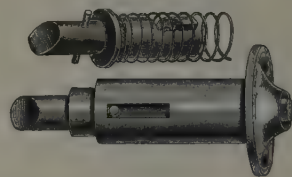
Seat Back Arm Lock, Bolt and Spring. Adams &amp; Westlake Company.
